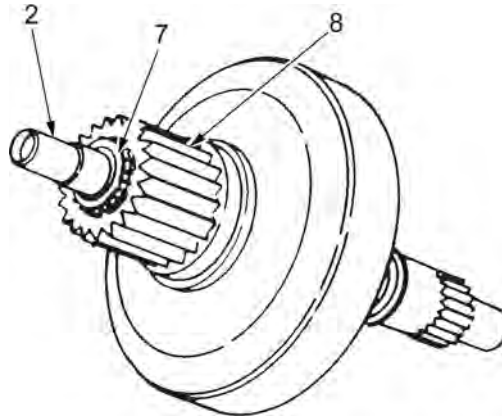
Rear Sun Gear and Attaching Parts Removal.
